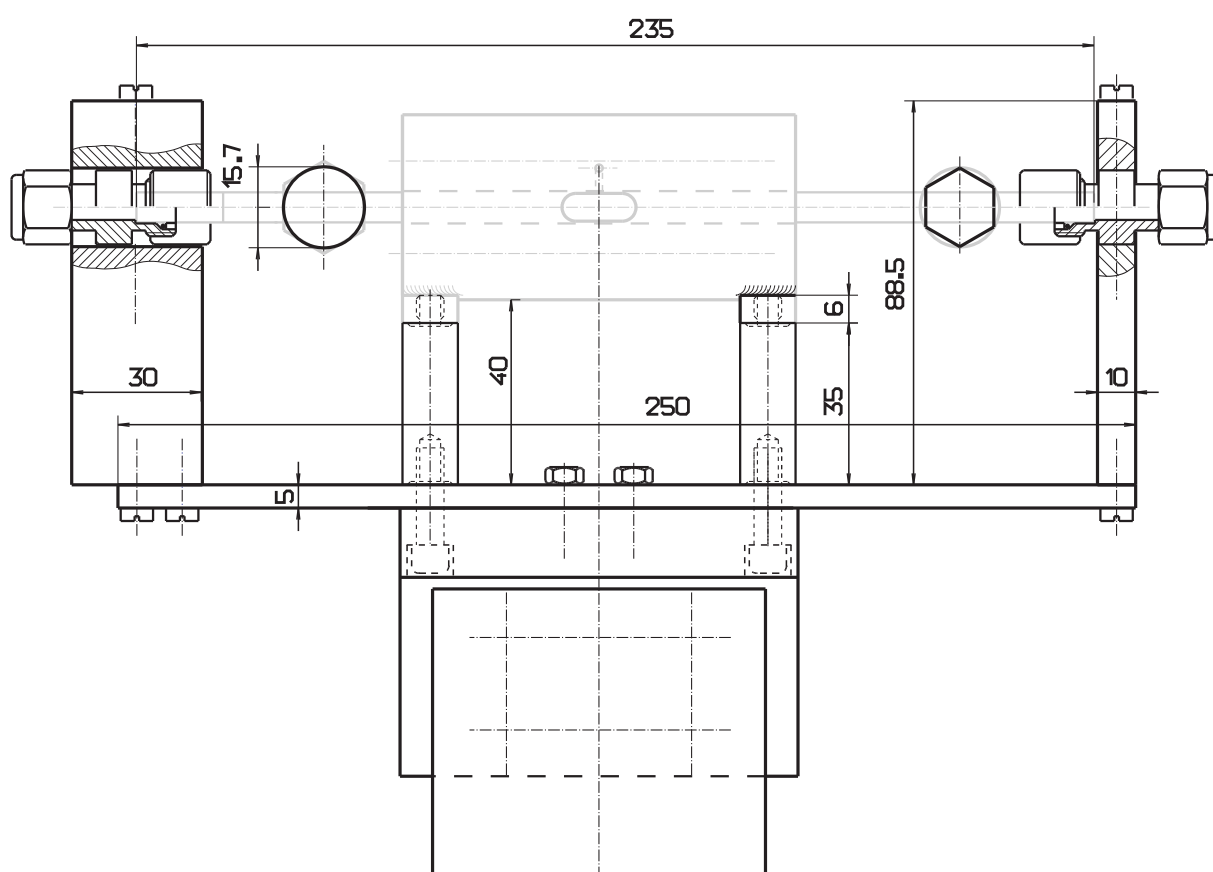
Technical drawing of the adjustable mounting platform of the inconel alloy heating block and the modified ultra-tight gas connectors used to connect the metal tubes to the quartz reactor (dimensions given in mm)
